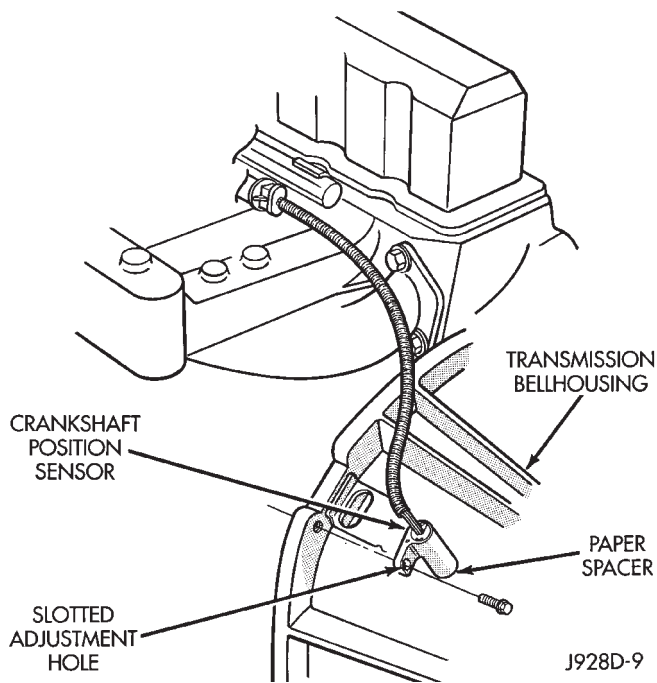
Crankshaft Position Sensor—4.0L Engine—Without 42RE Transmission
